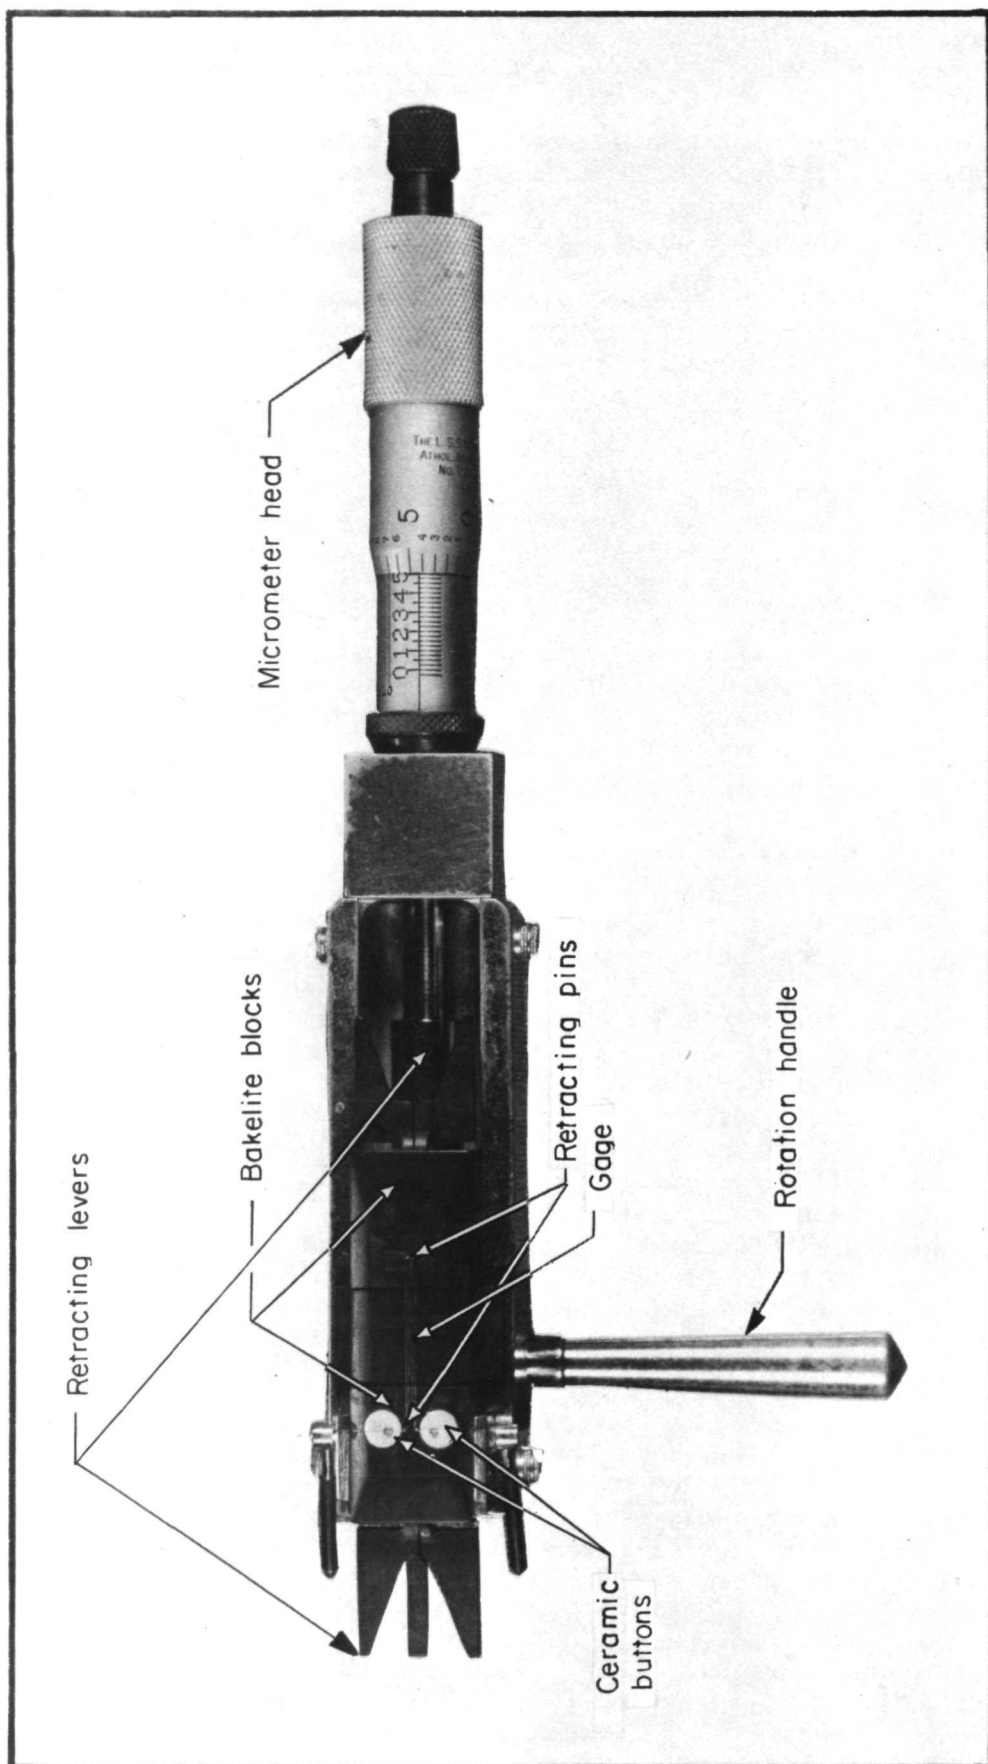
GAGE WINDING FIXTURE HEAD
